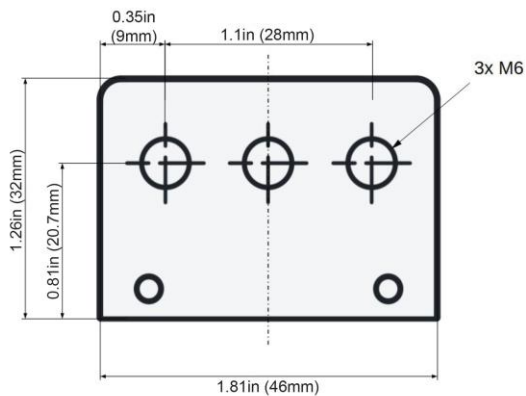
Mounting Bracket Hole Dimensions Figure 4-15. Mounting Bracket Assembled
